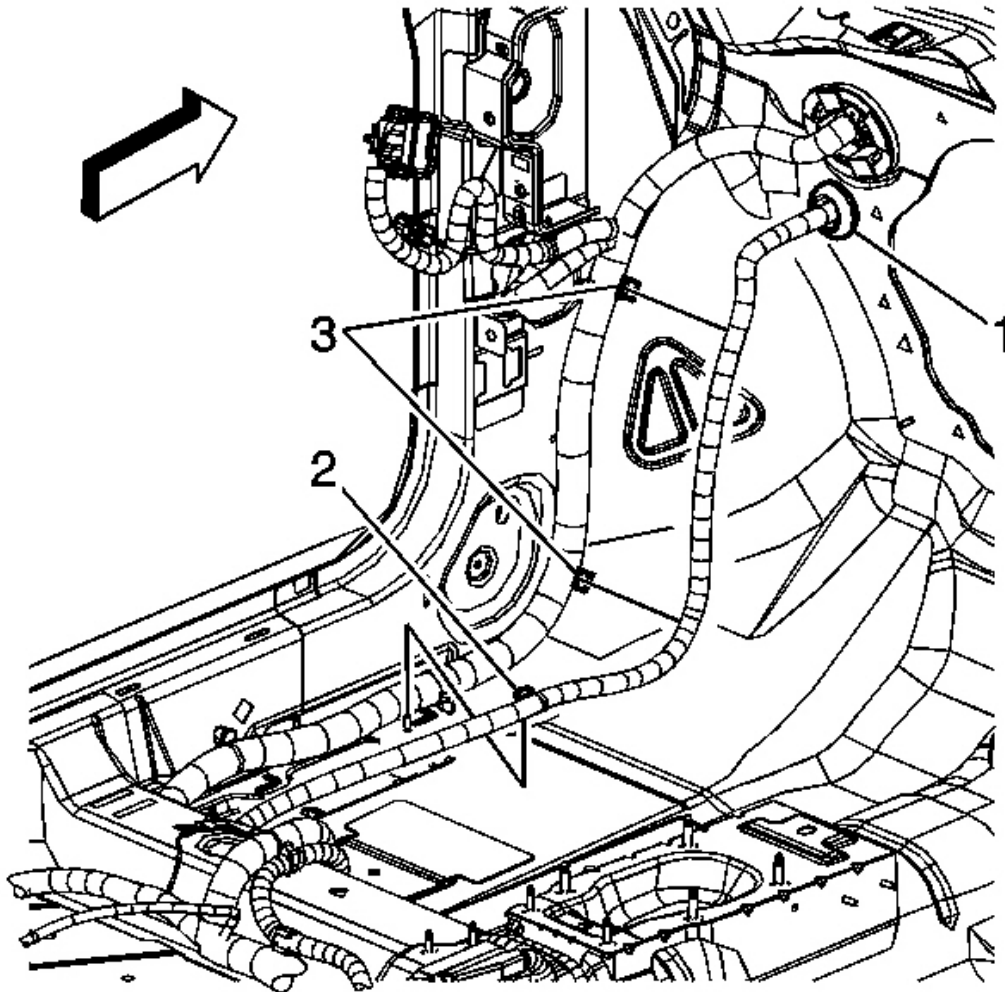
View Of Positive Battery Cable Clip To Weld Stud
